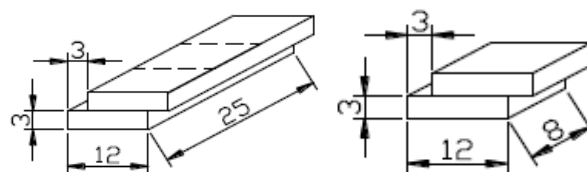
Diffusion bonding fixture [25]Figure 3. Dimensions of diffusion and shear test specimens [25]
